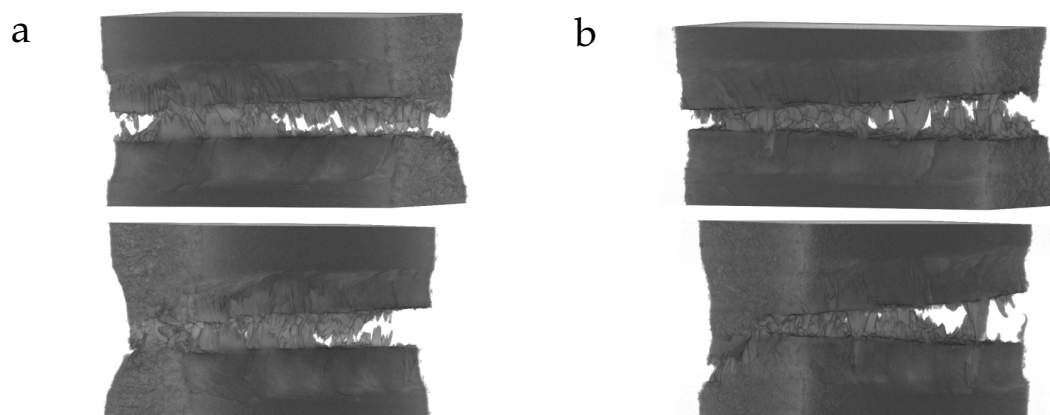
Etched cross-sections of AISI 430Ti after exposure to the corrosive environment for 20 h, both welded at an energy input of  $20 \text{ J} \cdot \text{mm}^{-1}$  and extracted from a single weld seam.
